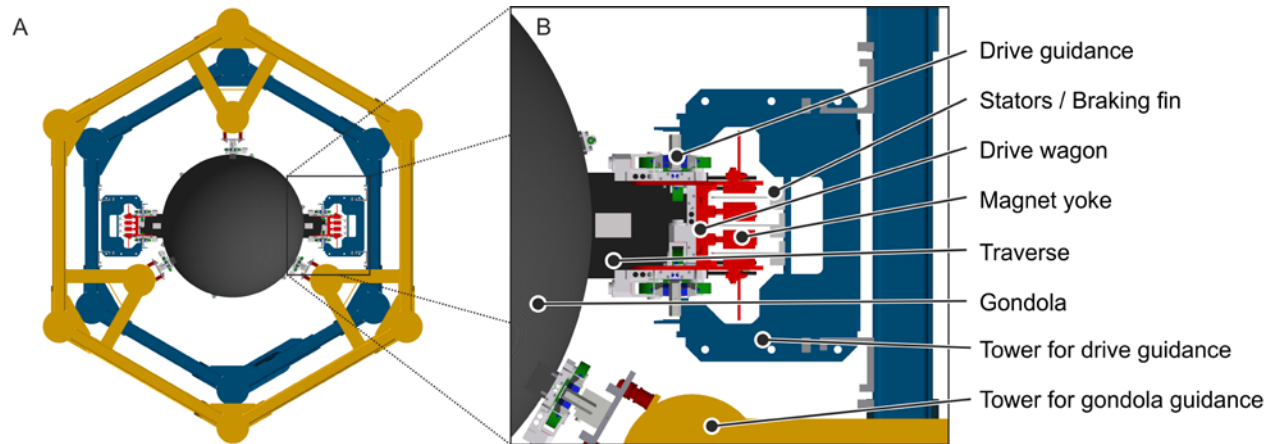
Detailed overview of the drive configuration. (A) Top view of the tower-in-tower construction. (B) Section with the highlighted drive configuration.
